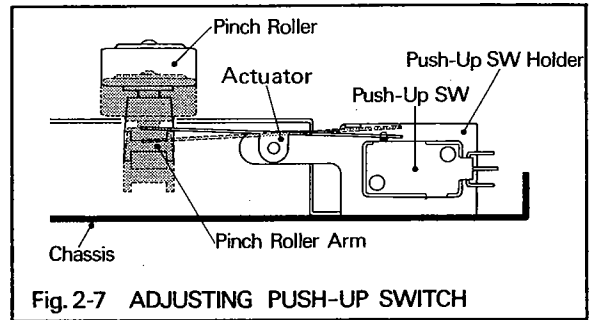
ADJUSTING PUSH-UP SWITCH
